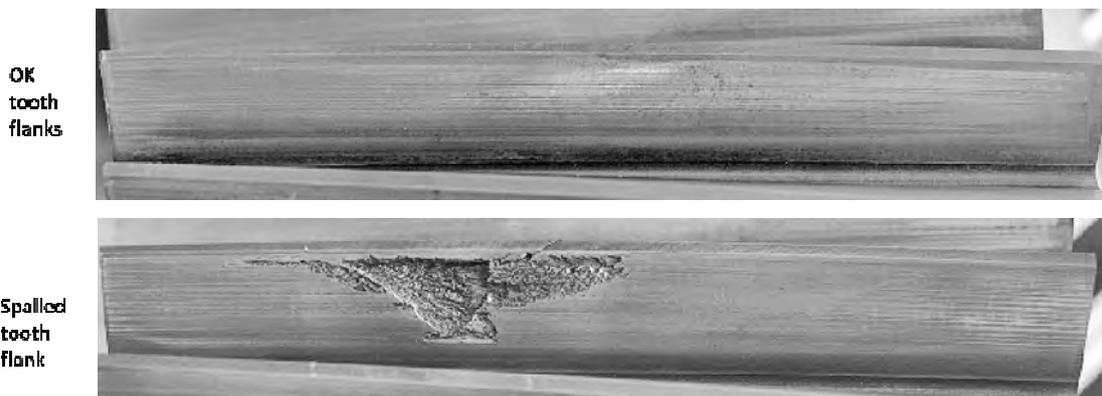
Severe spalling found only on a tooth flank, all other flanks of this pinion are OK
